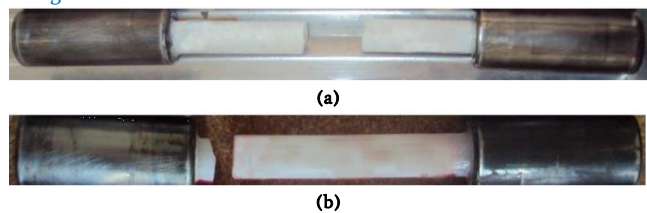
(a) Broken specimen due to the previous flaw (b) true broken specimen after fatigue test.
